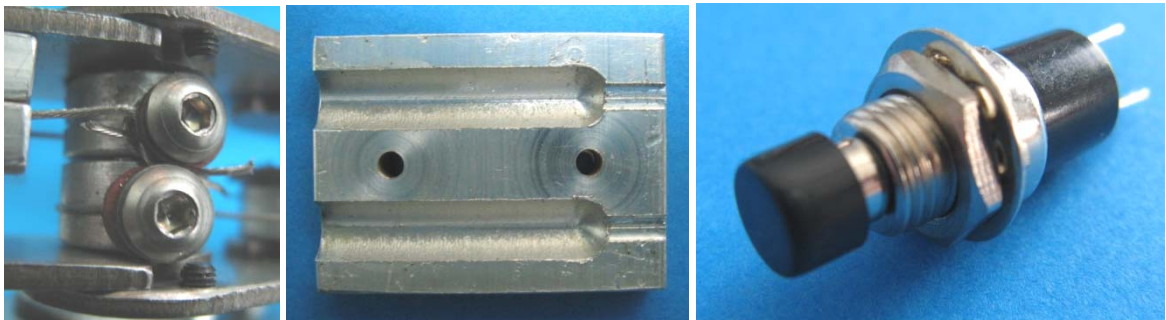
Some of the improvements performed of the basic UOM Robot Hand design: (left to right) Screws fixing cables to the pulleys; New sleeves with manufactured step; Push-to-break switch
